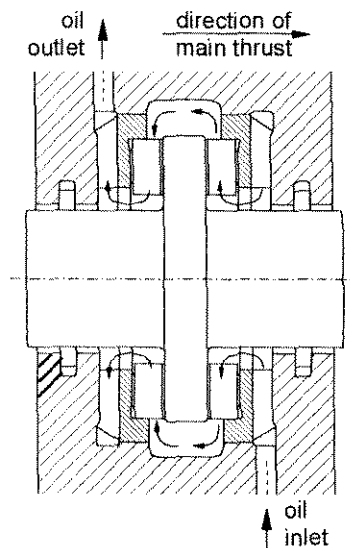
a Tilting pad thrust bearing - flooded lubrication
